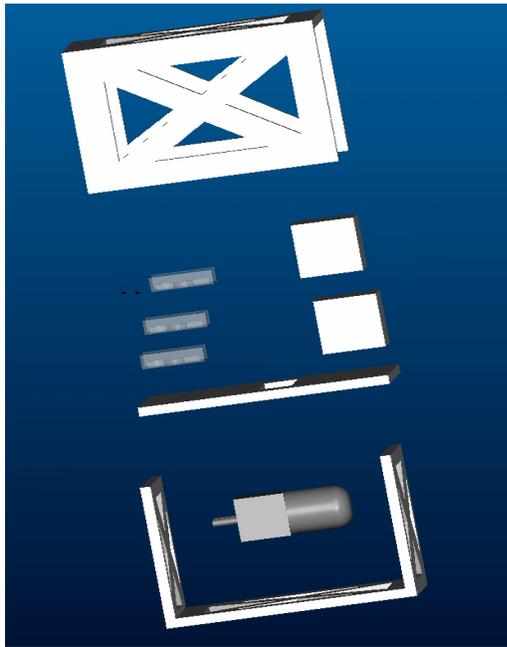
Exploded view of Shawenella experiment showing outer structure, growth chambers, vessels, electronics support plate, pump and bottom structure.
